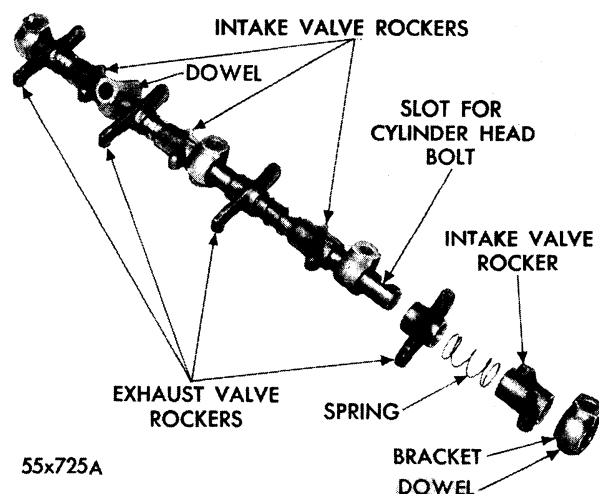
Rocker Shaft Assembly (Disassembled View) (SpitFire)
